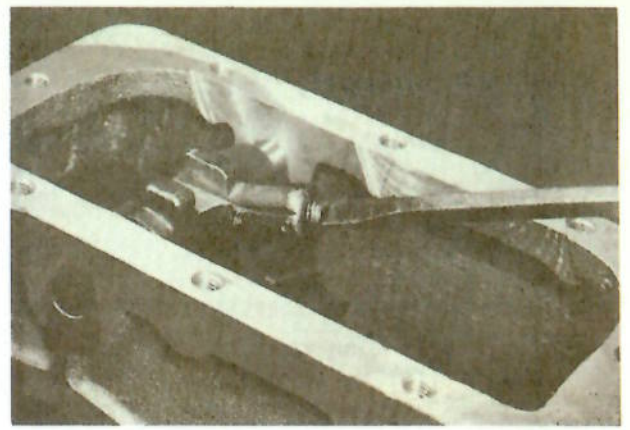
REMOVING THE GEAR SHIFT FORK PLUG FROM THE HIGH AND LOW FORK.
